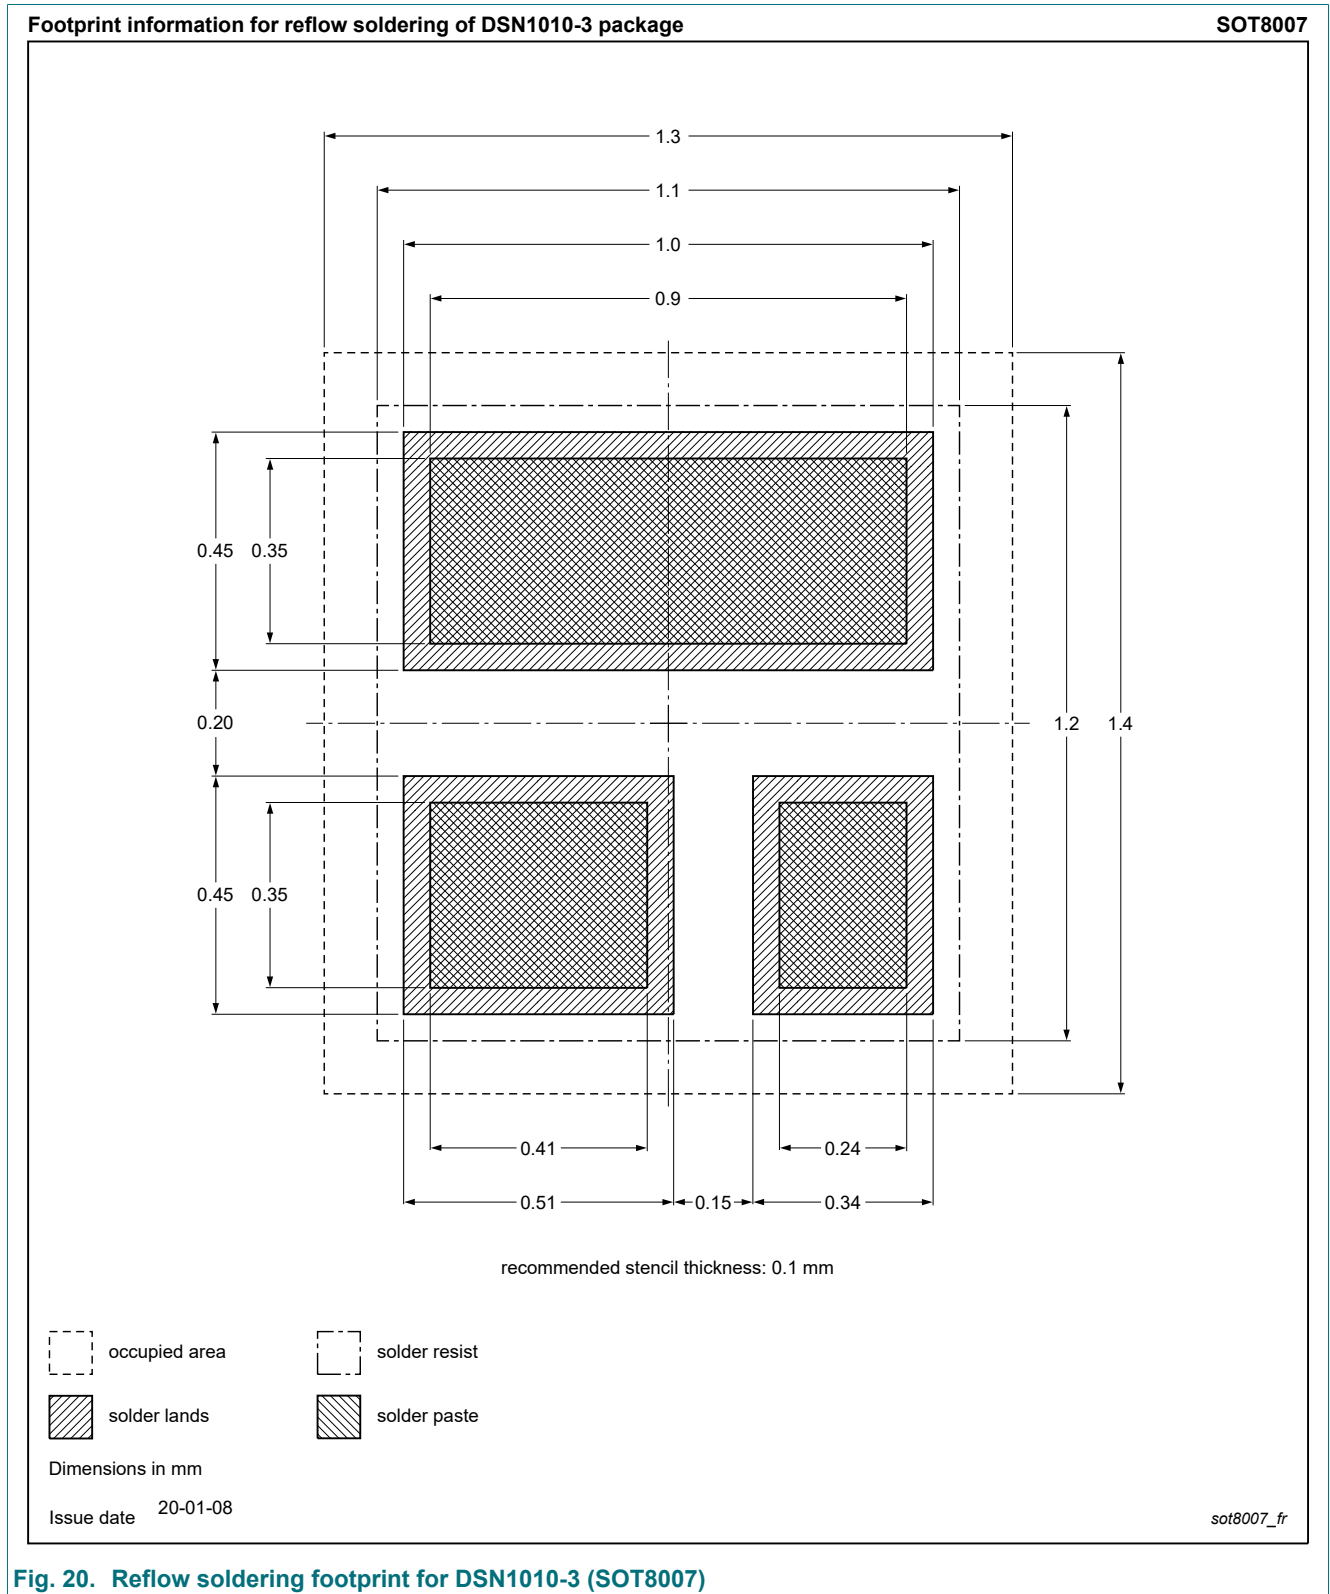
Reflow soldering footprint for DSN1010-3 (SOT8007)
